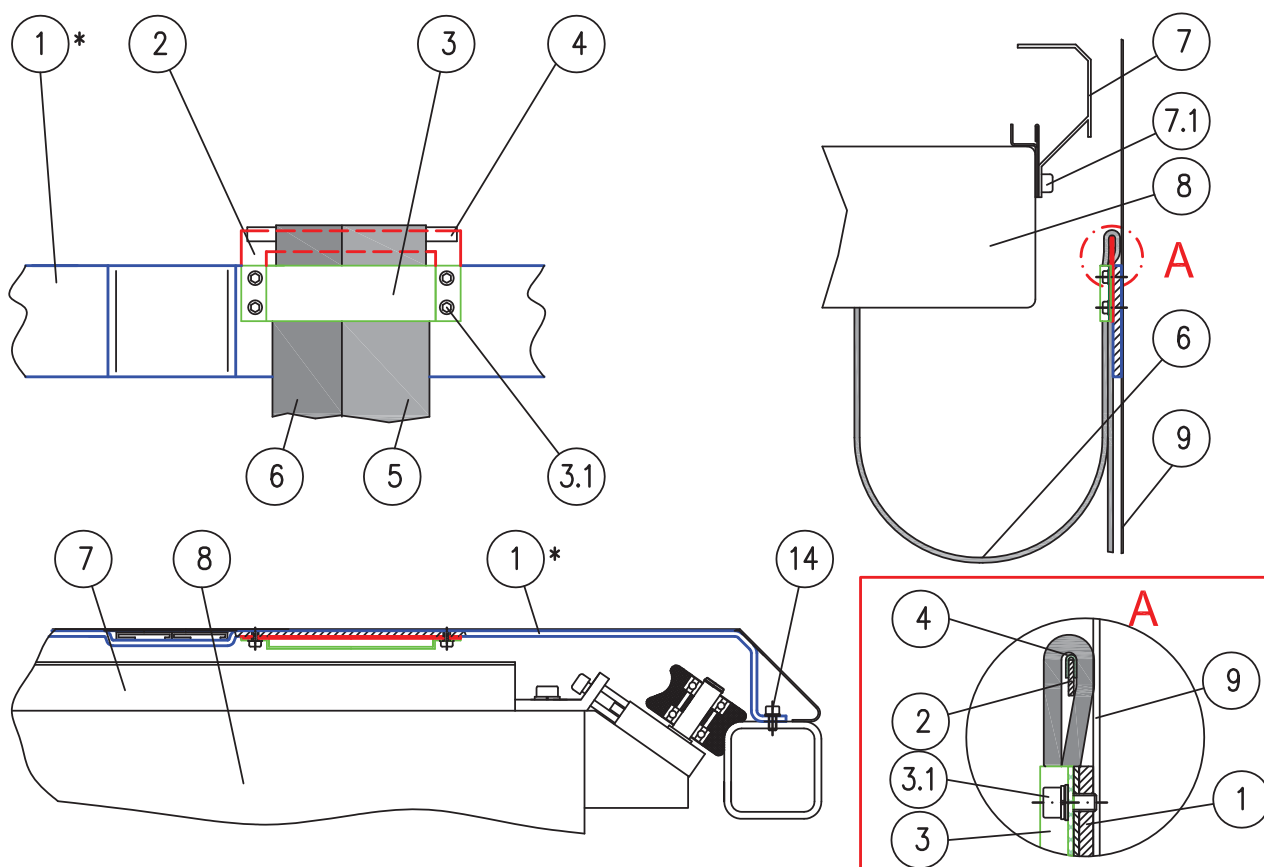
Standard method of fastening cables to cable carrier side bracket, Detail A from Fig.1
